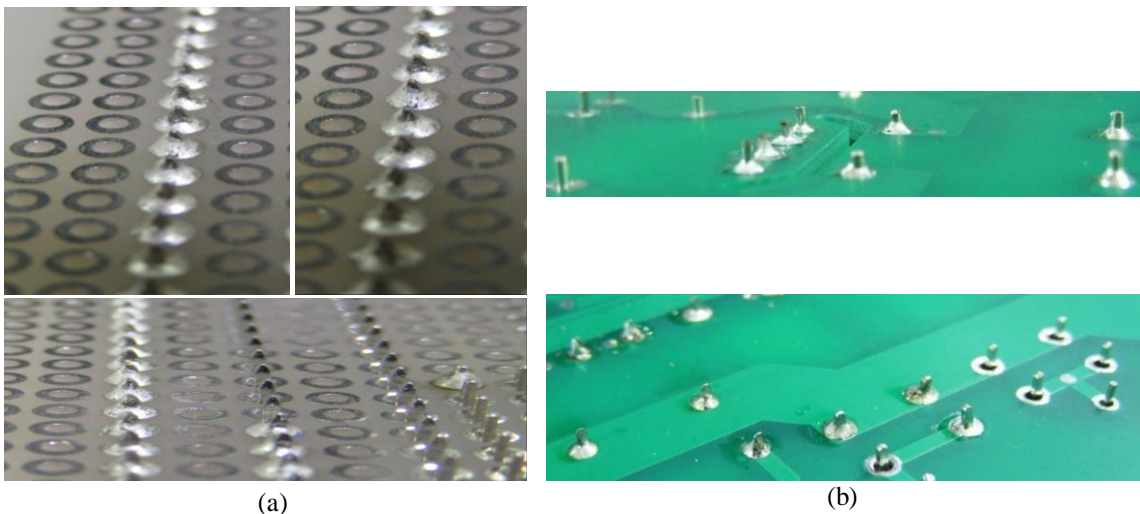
Solder joints performed by the THT soldering system. (a). Soldering performed on a regular dot board. (b). Solder joints performed on an industrial PCB
